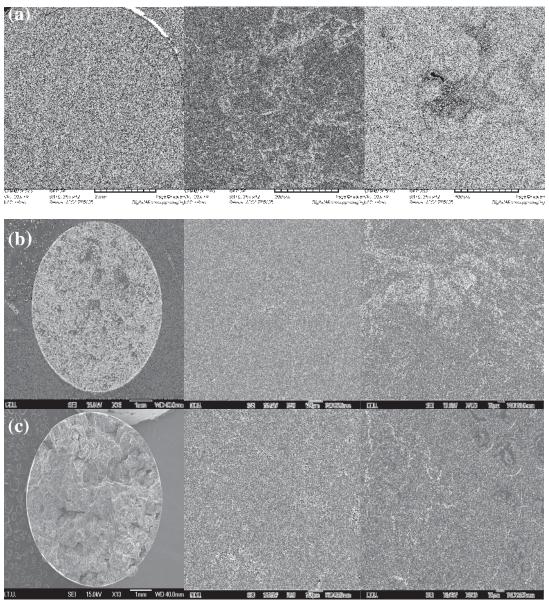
The SEM images of fracture surface; a) quartz sand mould, b) chromite sand mould c) ceramic mould
